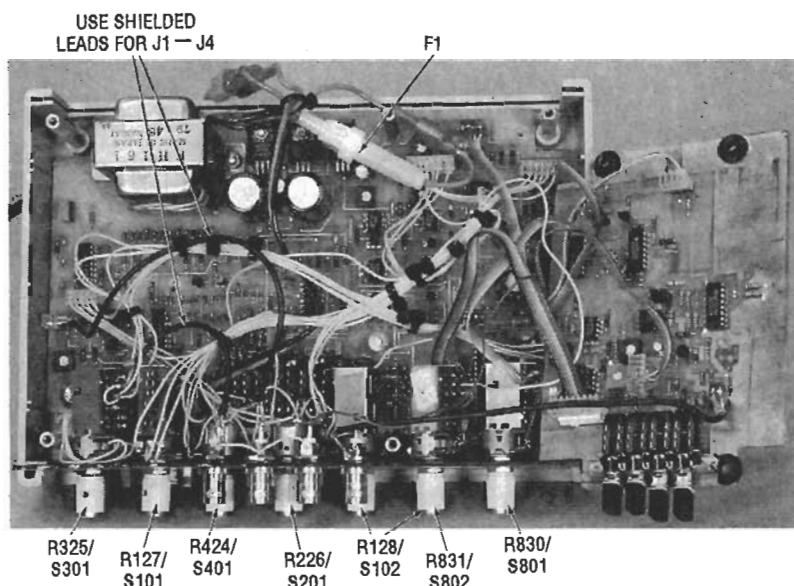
INTERNAL PHOTO OF the author's prototype. Start construction by connecting all cable assemblies to switch-potentiometers mounted on the front panel.
